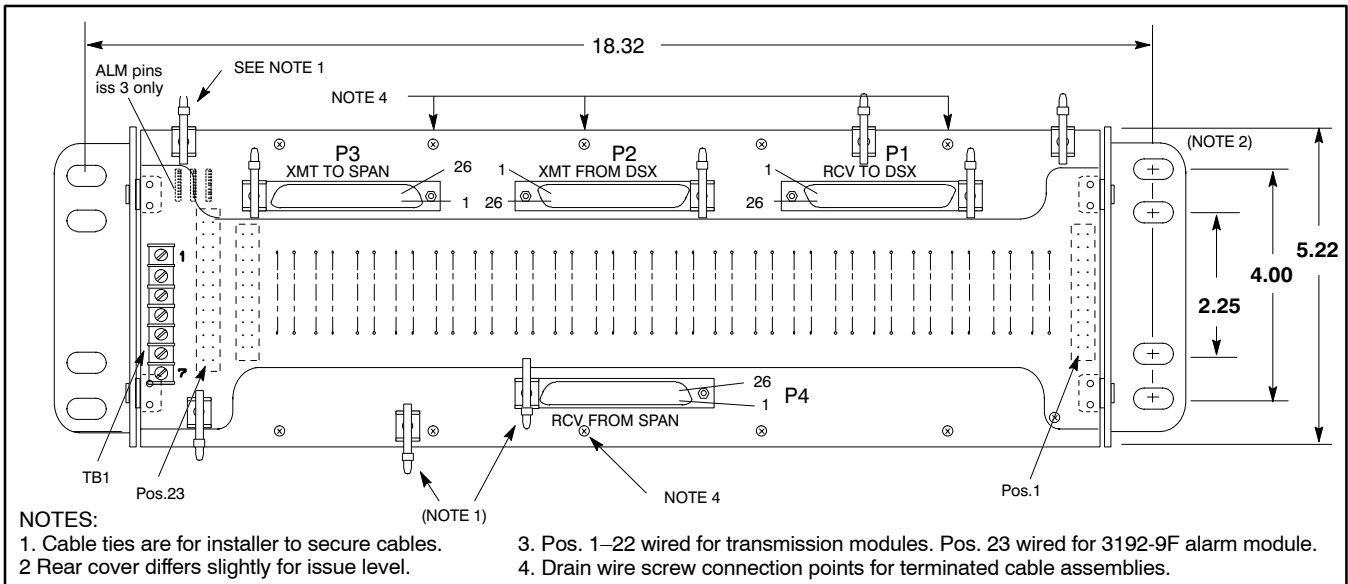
319-02 STS Shelf Assembly, 19" Connectorized, Rear View
